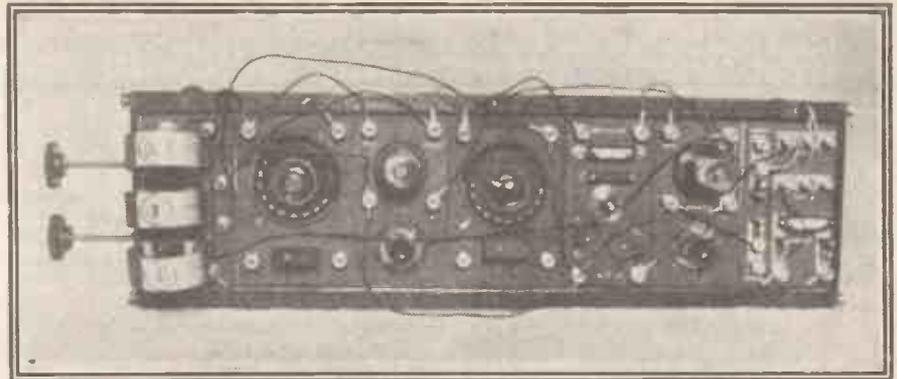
A bird's-eye view of the panels arranged for a two-valve set.
